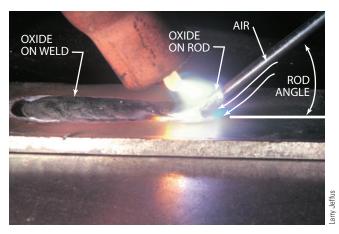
Too much filler rod angle has caused oxides to be formed on the filler rod end.
